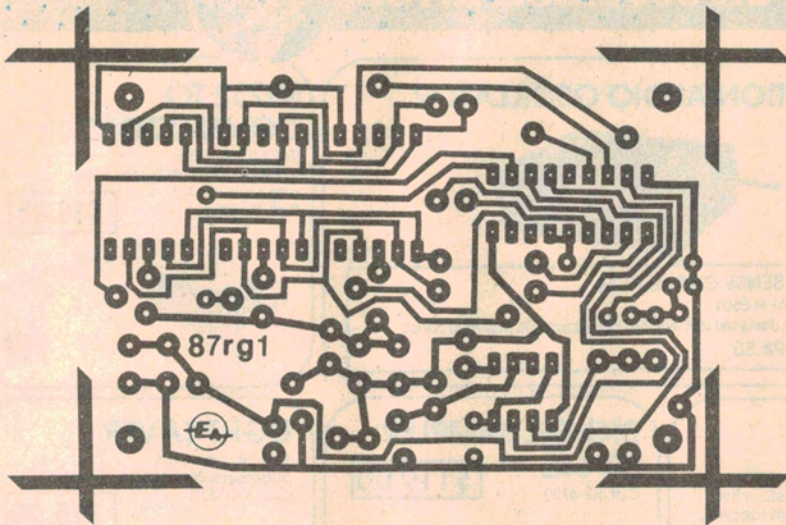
actual size PCB artwork. The board is coded 87rg1 and measures 82 x 55mm.
